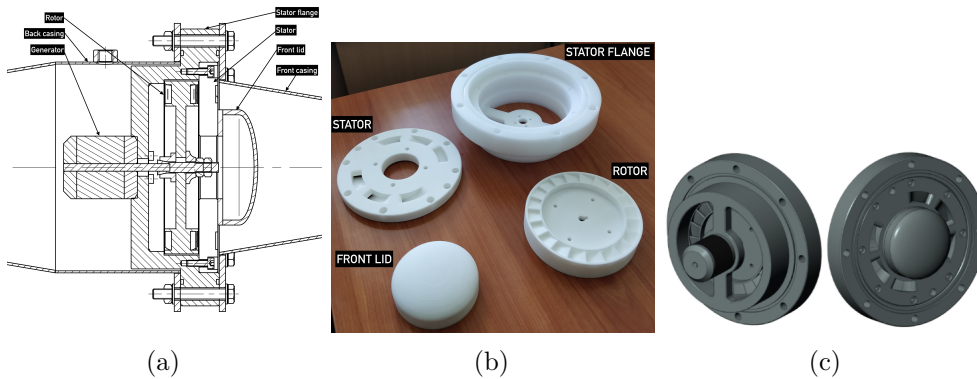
Designed turboexpander for the APC, (a) cross section of the assembly, (b) manufactured plastic turbine components, (c) a 3d model of the turbine
